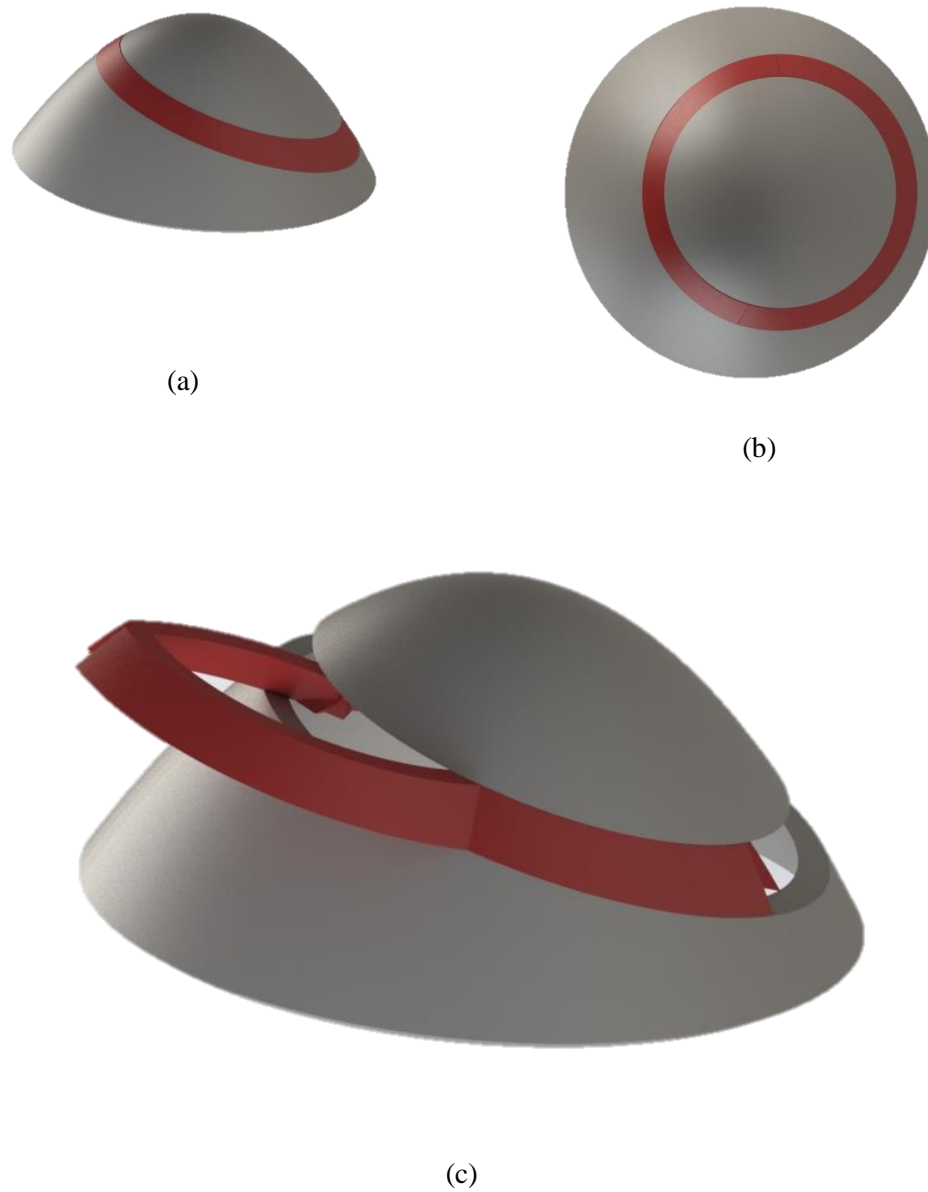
Shows a cylindrical thick DM with slanted axis made on a paraboloid. (a) Isometric view when the mechanism is conformed, (b) Top view of the conformed system and (c) Isometric view of the mechanism in deployed state.
